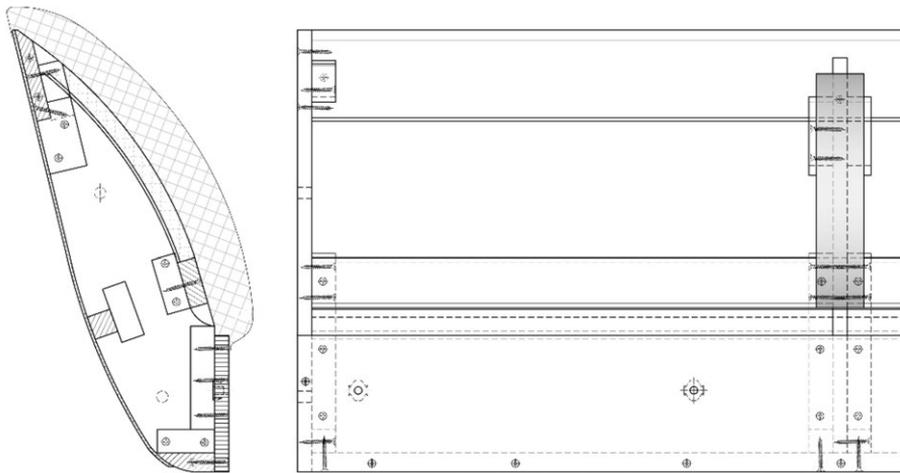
Technical drawing of the supporting frame of the backrest [B].
